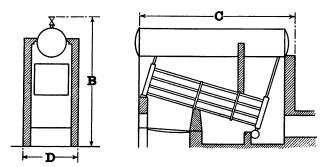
Babcock and Wilcox Water-tube Boiler. (Land type.)
